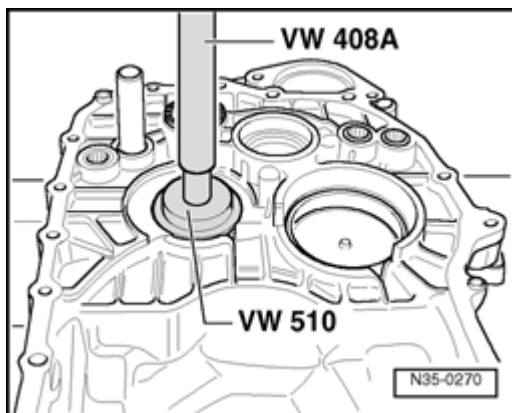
Pressing tapered roller bearing outer race into transmission housing
